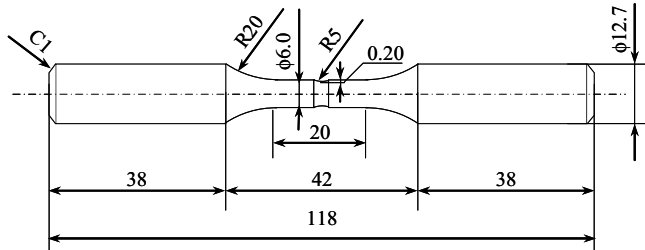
The shape of fatigue test specimens (Dimension in mm) .
